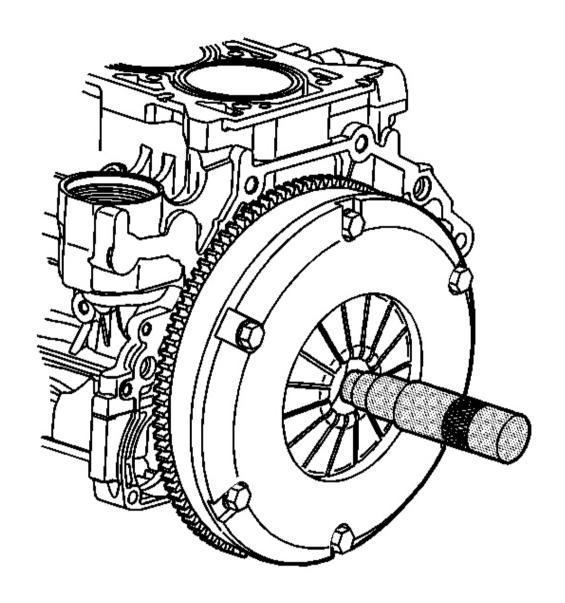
J 43482 & Clutch Disc Courtesy of GENERAL MOTORS CORP.
